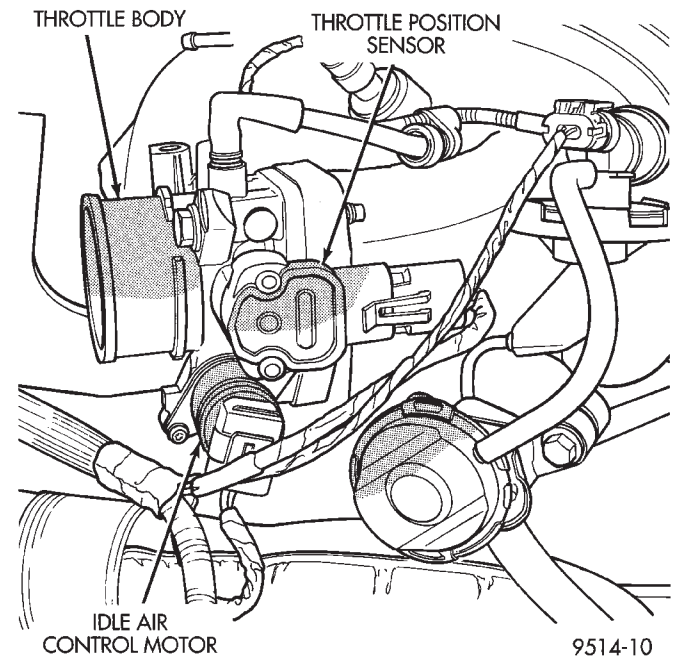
Electrical and Vacuum Connection to Throttle Body
